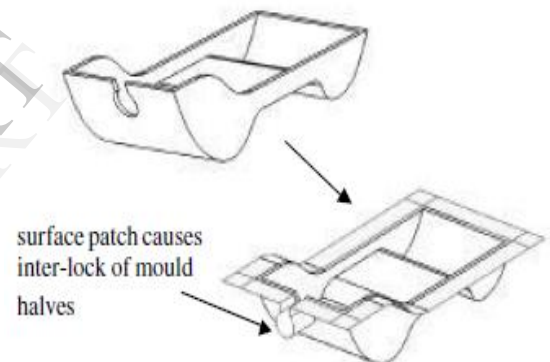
The method of extrusion causes inter-lock between mold halves. [3]
